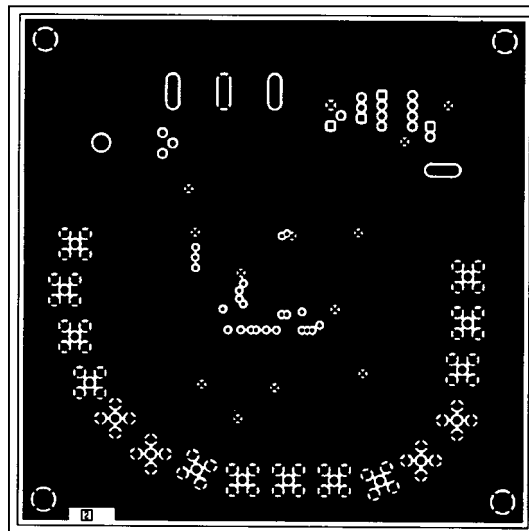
MAX555 EV Kit PC Board Layout—Layer 2 (Ground Layer)
